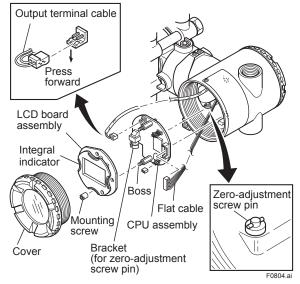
Removing and Attaching LCD Board Assembly and CPU Assembly
